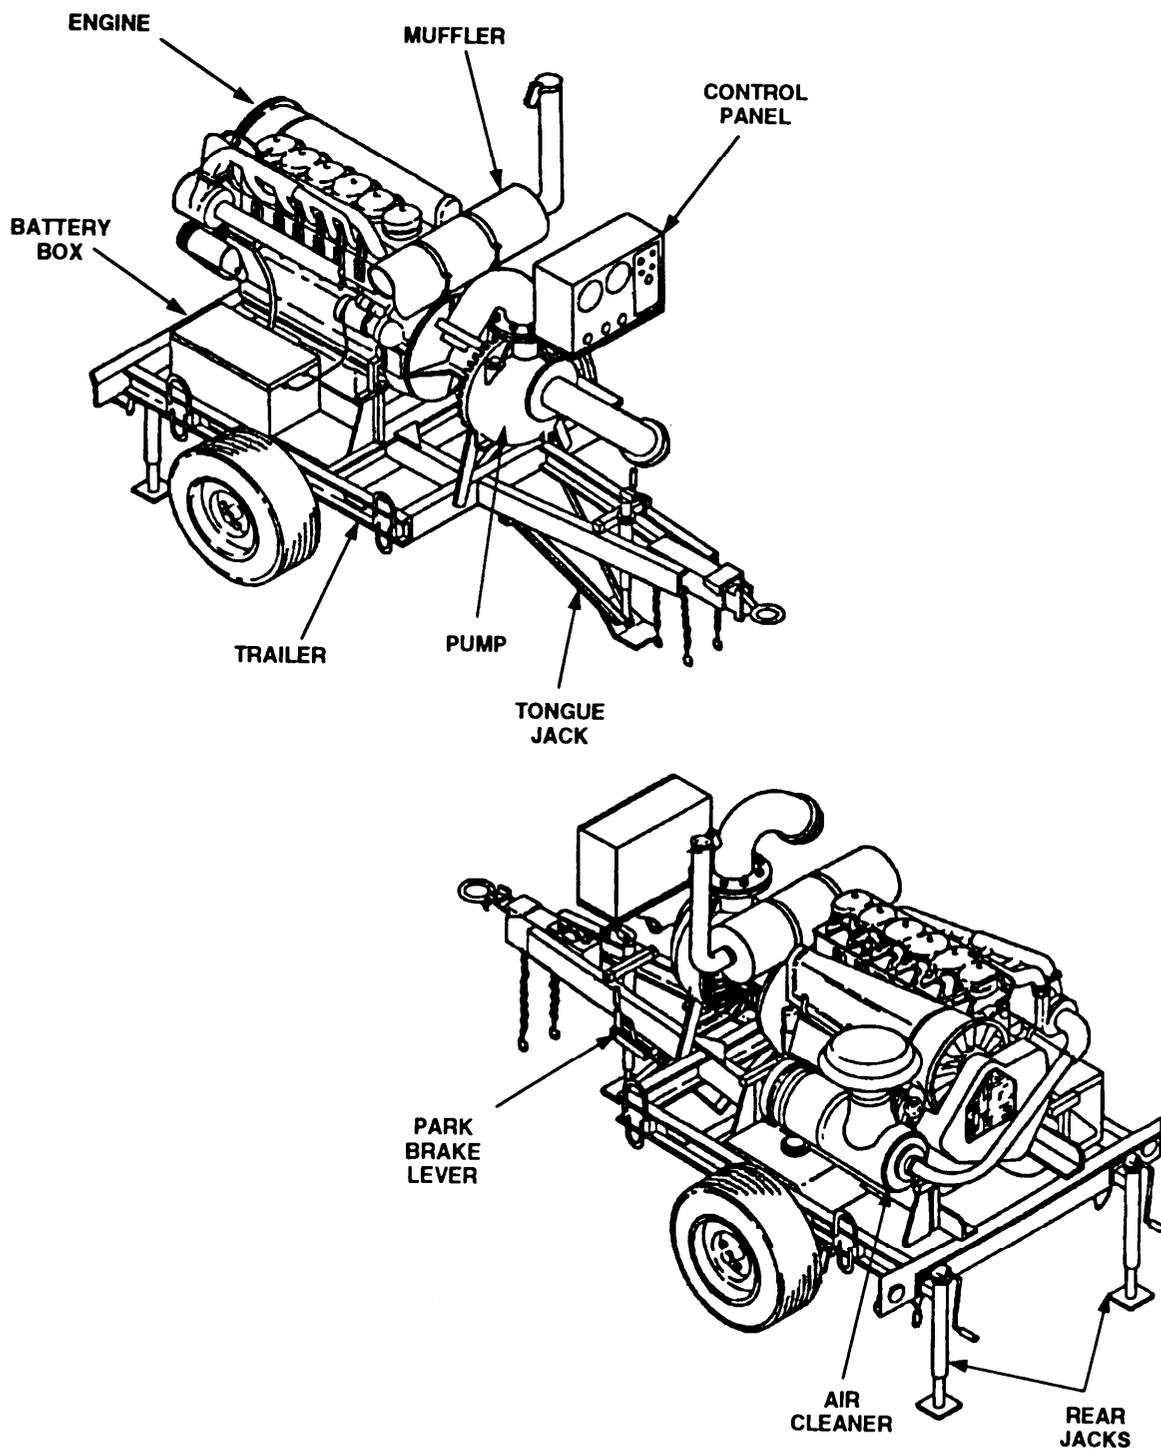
Features of 600 GPM Pumping Assembly Model US636HCCD-1.
